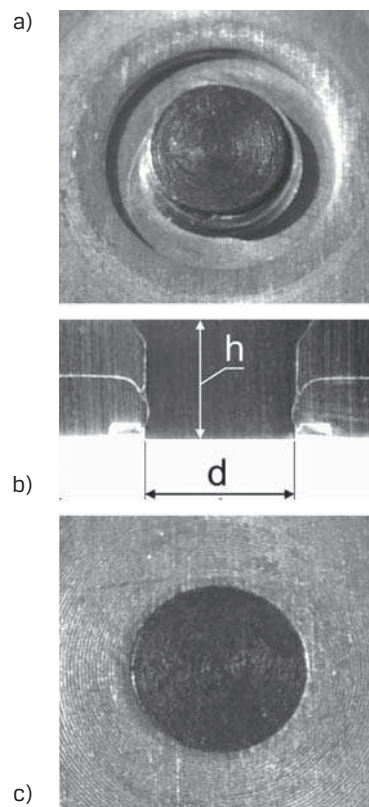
Aluminum sheet plate joint using the SolidRivet self-pierce riveting: a) support side (die contact side) view, b) joint cross section, c) rivet head view.
